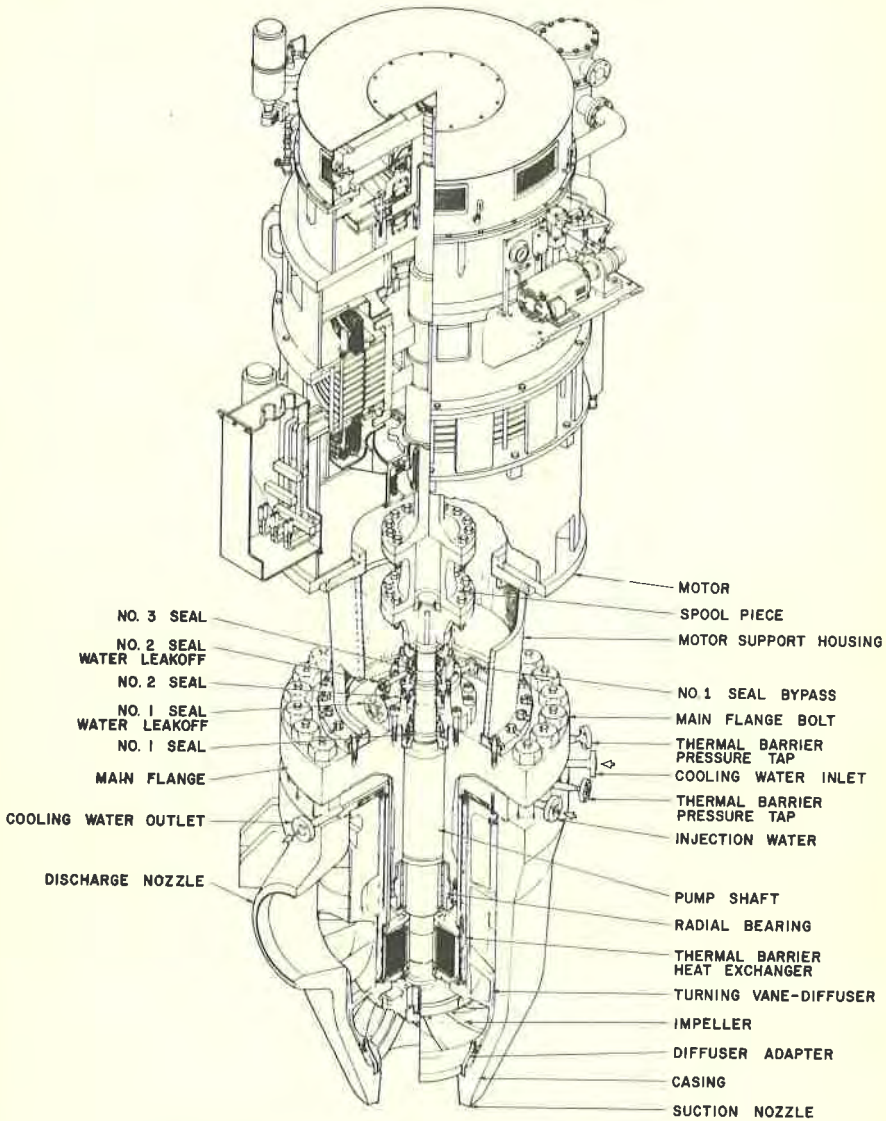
REACTOR COOLANT PUMP CUTAWAY VIEW
